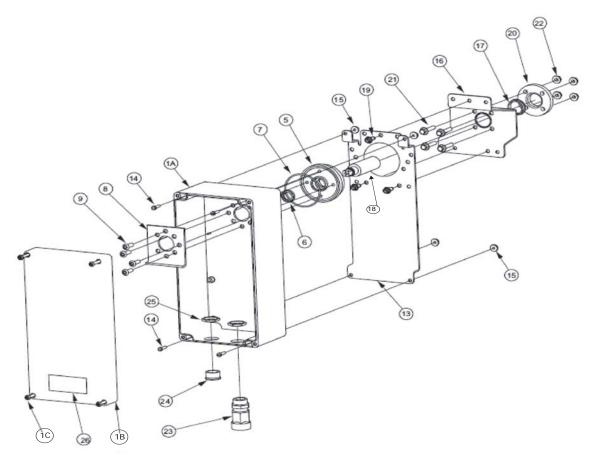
Parts Included in M9000-341 Weather Shield Enclosure Kit (See Table 1)
